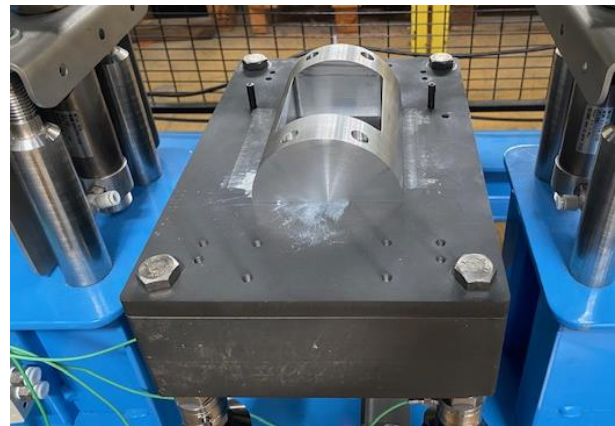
Fixture manufactured to impact Ø70mm curved panels
